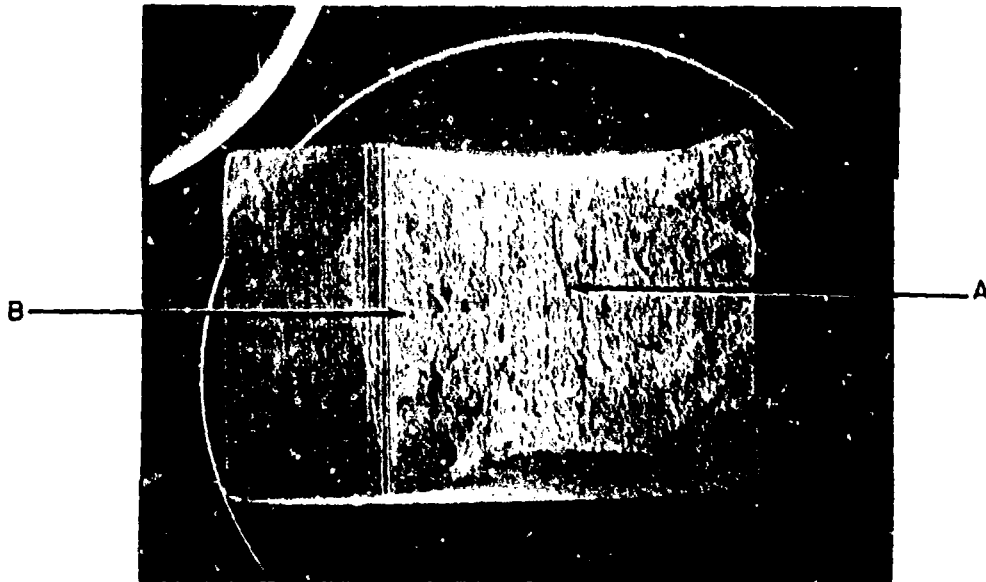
Fracture surface of a hydrogen-embrittled A-36 fatigue specimen, 8x.
